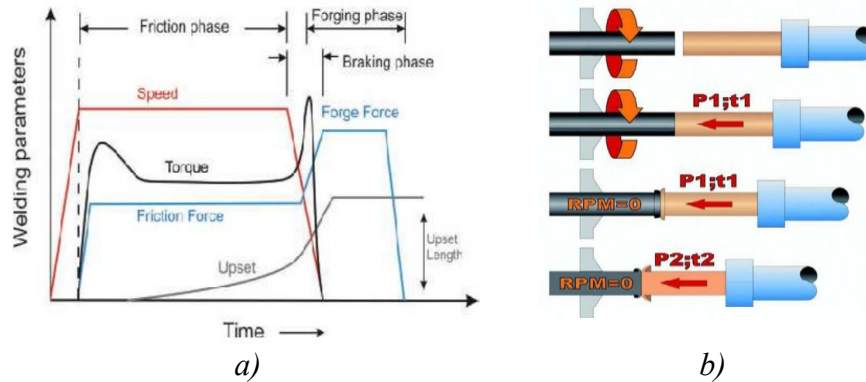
Parameters and phases of rotary friction welding process
